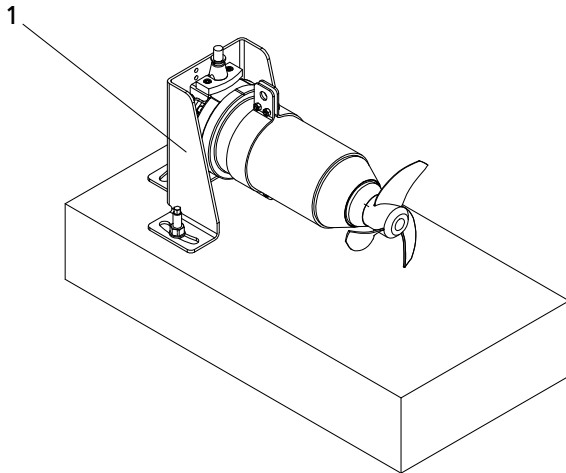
Installation using accessories set 6: permanent mounting of submersible mixer on tank floor
